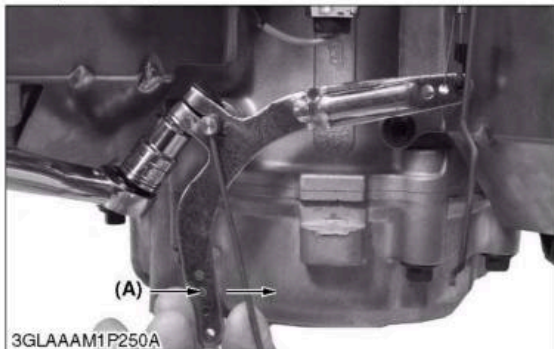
Adjusting Governor Lever (Air Cleaner Base Removed for Clarity).
